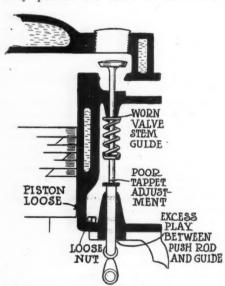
PLACES TO LOOK FOR A MOTOR KNOCK
